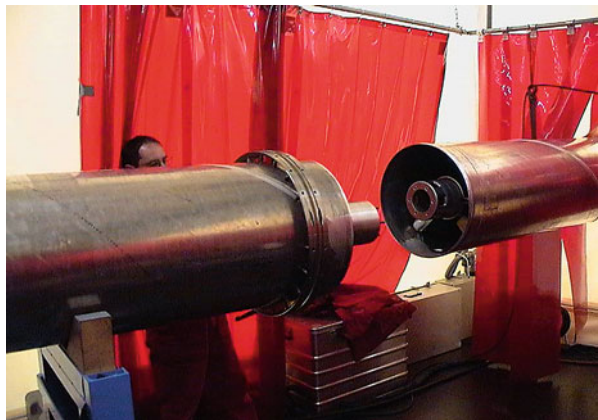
Orbital welding machine for enclosures and phases
